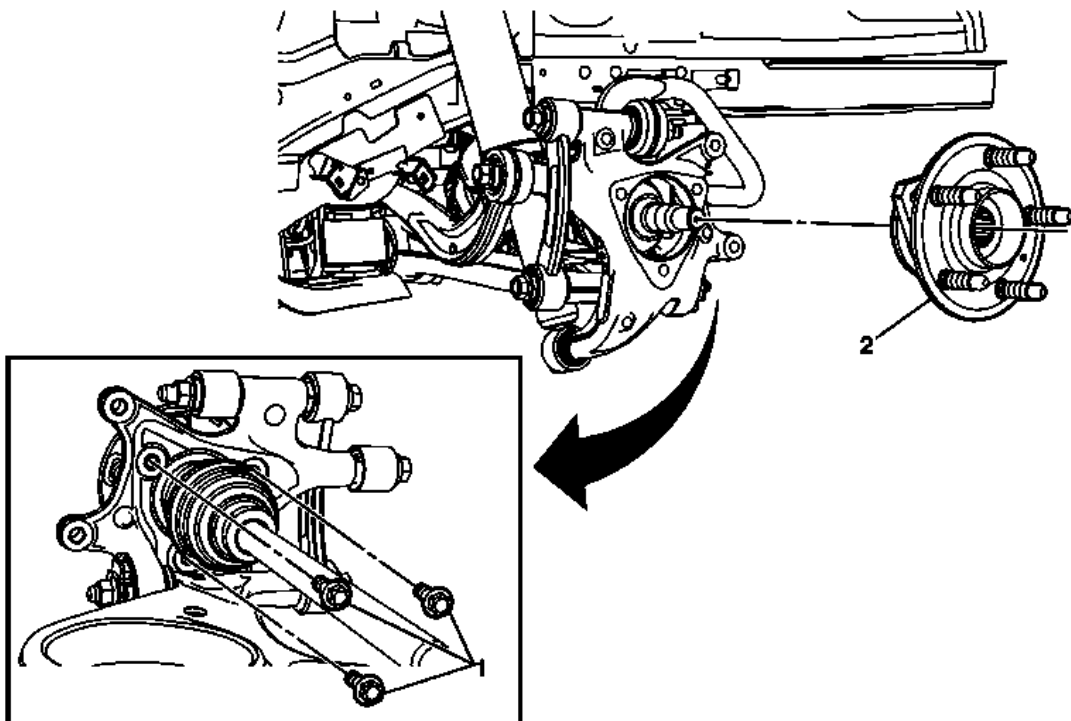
Rear Wheel Bearing And Hub (GNE)
